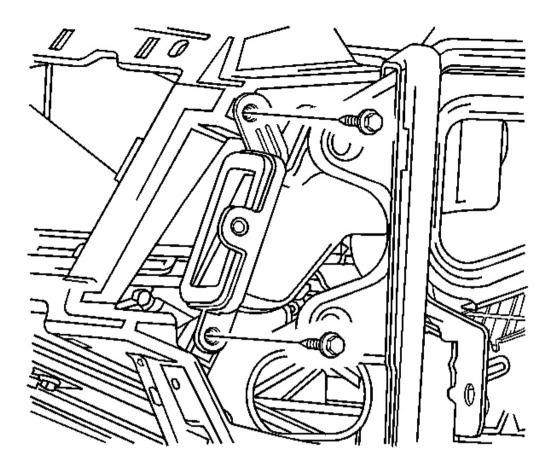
RH Air Outlet Duct Courtesy of GENERAL MOTORS CORP.
